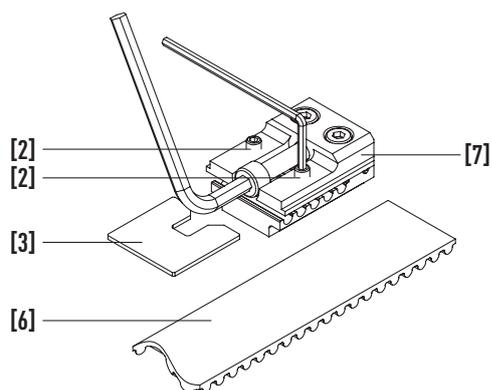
Removing the toothed belt from the belt tightener (HT100B)
